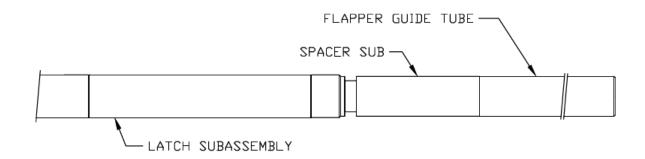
FLAPPER GUIDE TUBE INSTALLATION
